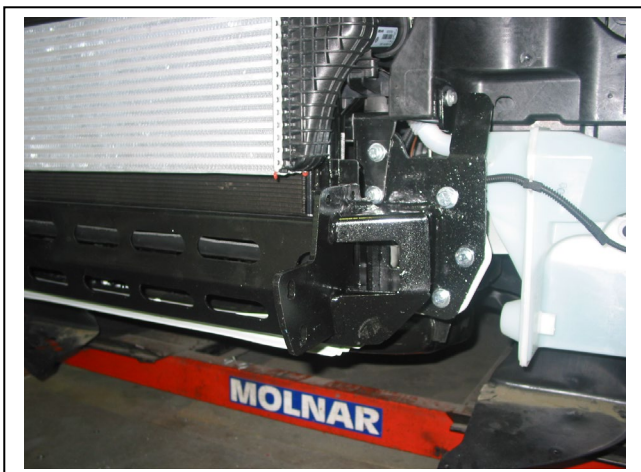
Bumper support attached to vehicle. Passengers side shown.
